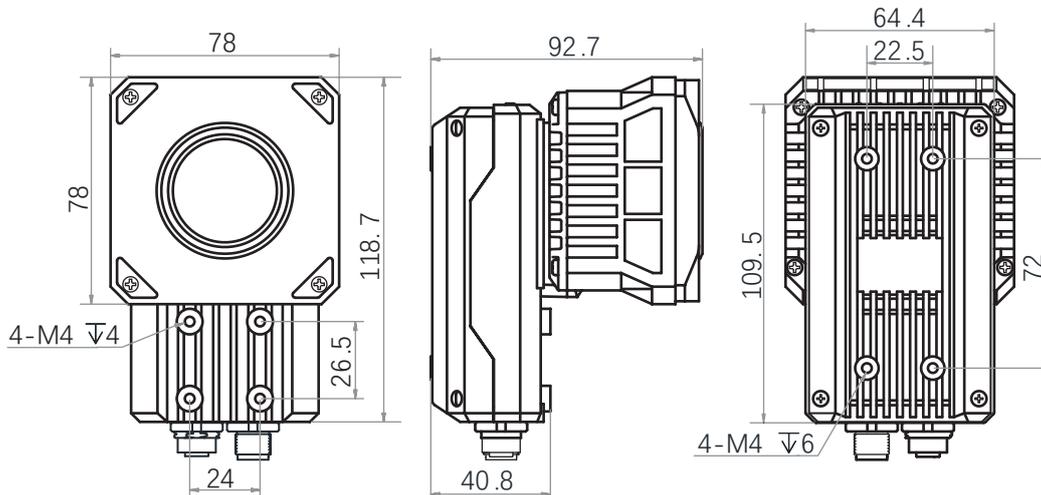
Mechanical Dimensions (in mm) of the code reader with 78 \* 78 \* 92.7 mm housing (Built-in LED lamps and no lens.).
